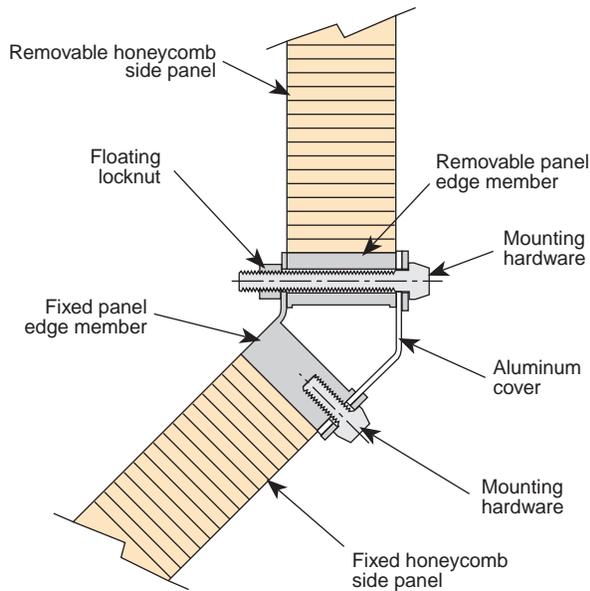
The cross section through the column formed by the side panel edge members and removable aluminum cover. The side panels are of aluminum honeycomb construction with magnesium inserts and edge members.
